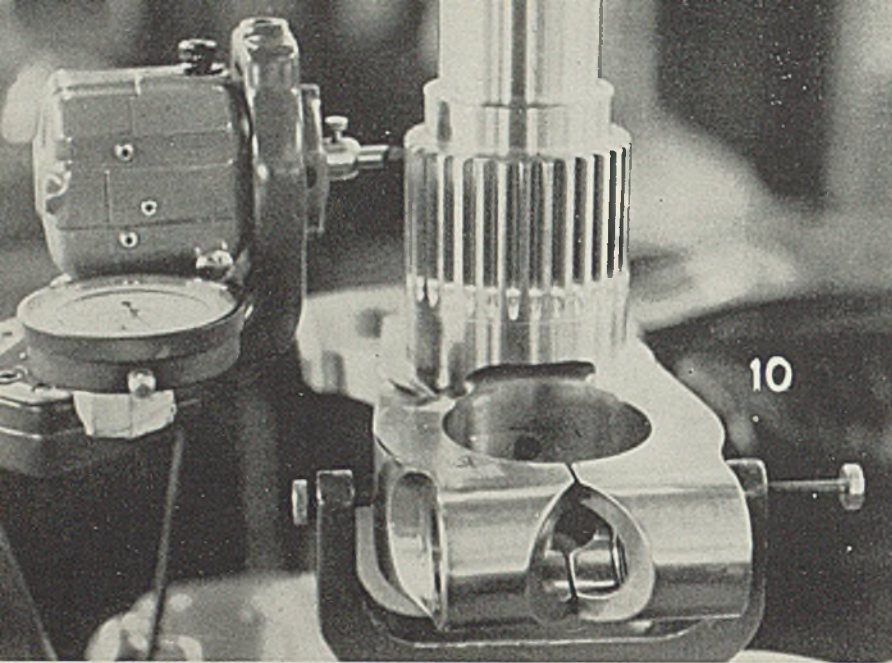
In this Illinois gear checker, completed spline is being inspected after hobbing and grinding. Profile of tooth involute, being checked here, is held to 0.0002-inch
